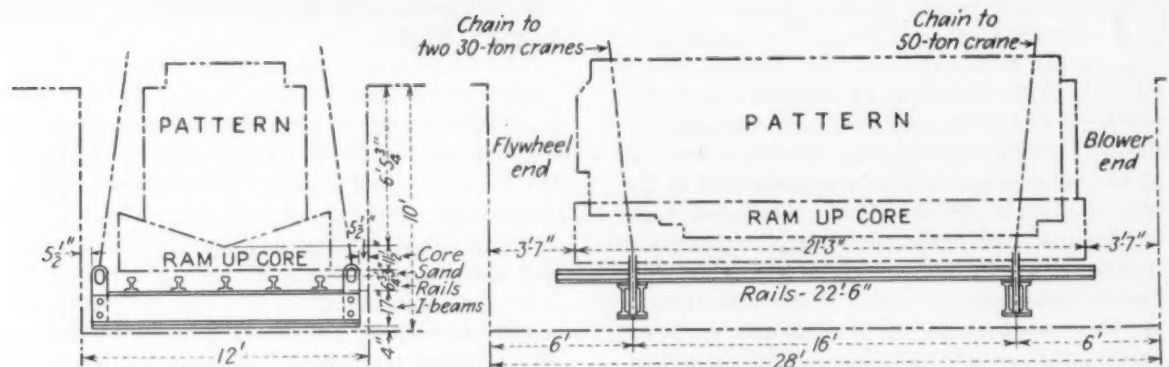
Arrangement for pit molding the 32-ton casting. Note pairs of I beams, assembled to form lifting beams.
